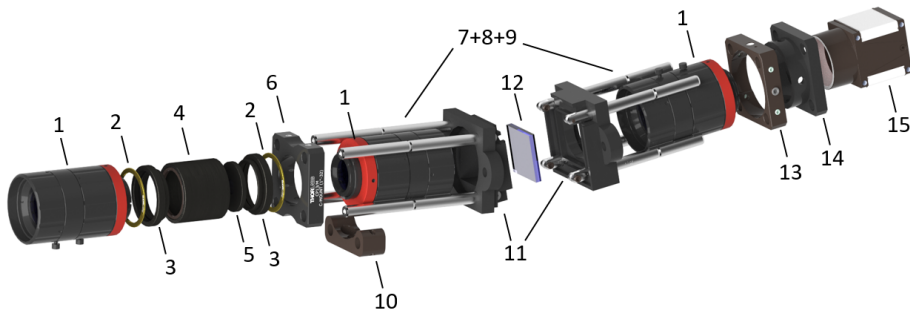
Exploded view showing the components of HSI V6 in CAD. (1) Objective, (2) spacer ring, (3) adapter ring, (4) lens tube, (5) slit, (6) cage plate for lens tube, (7+8+9) steel rods and swivels, (10) mounting bracket, (11) grating holder, (12) grating, (13) cage plate for detector mount, (14) detector mount, (15) detector. Numbers coincide with item numbers in Table 3.2.
